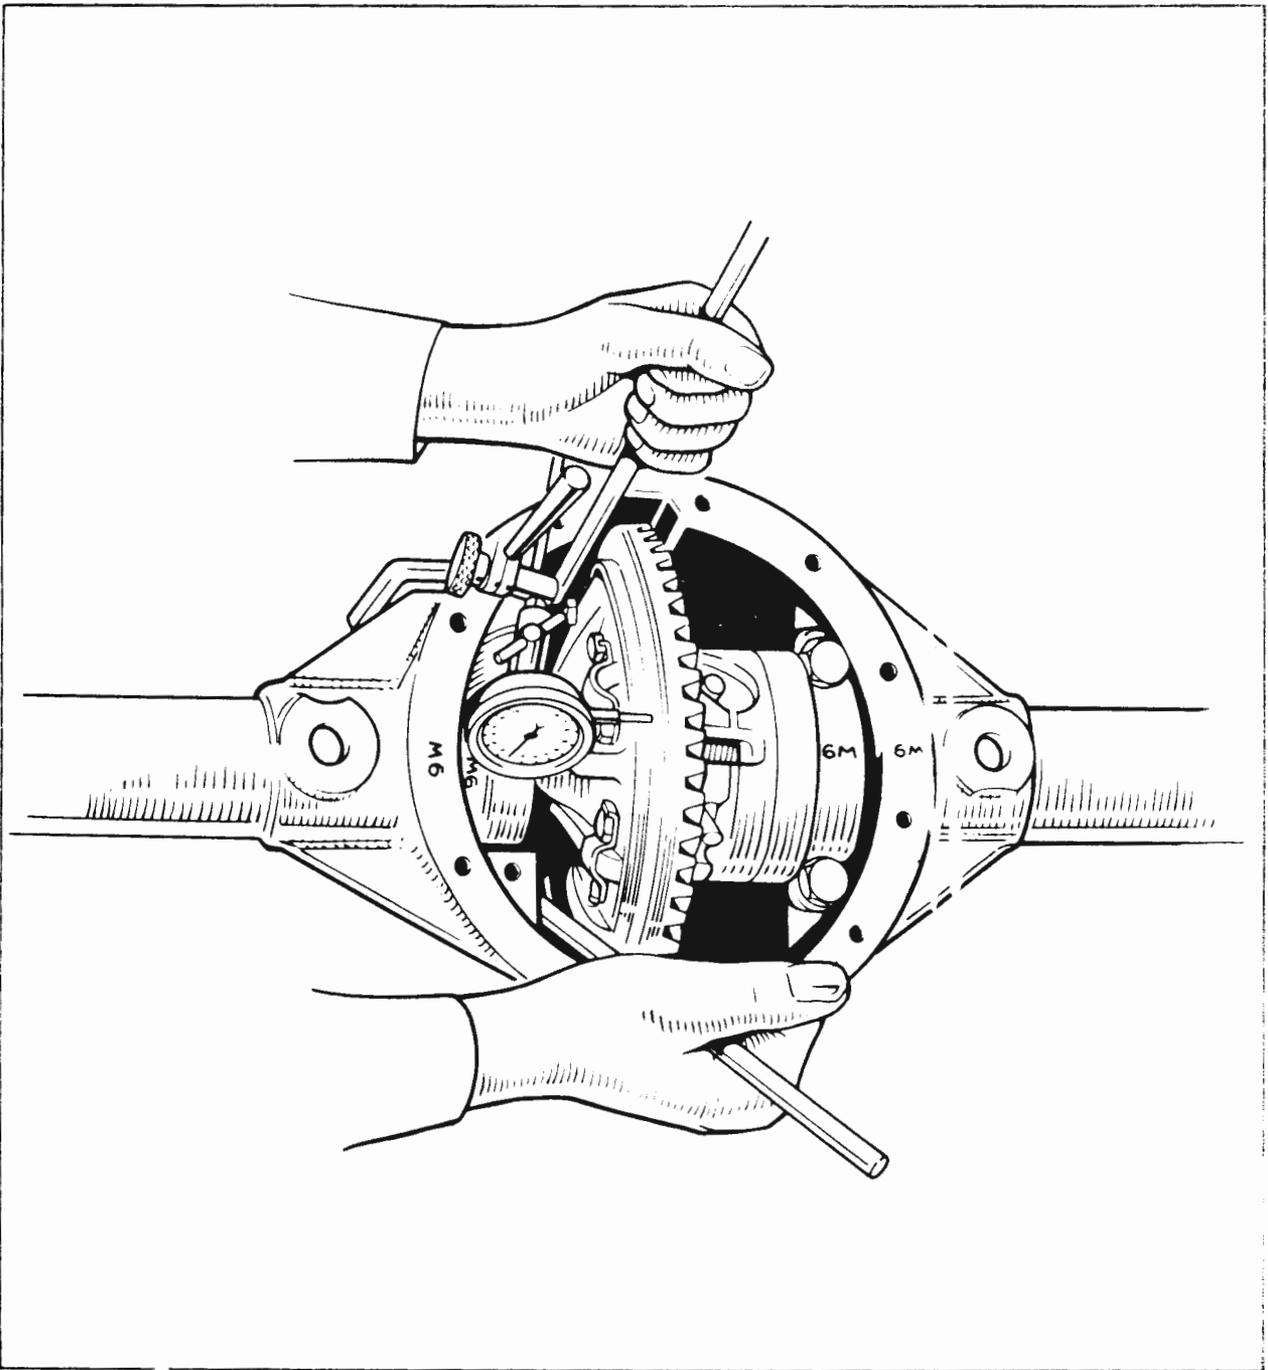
ADJUSTING DIFFERENTIAL BEARING
